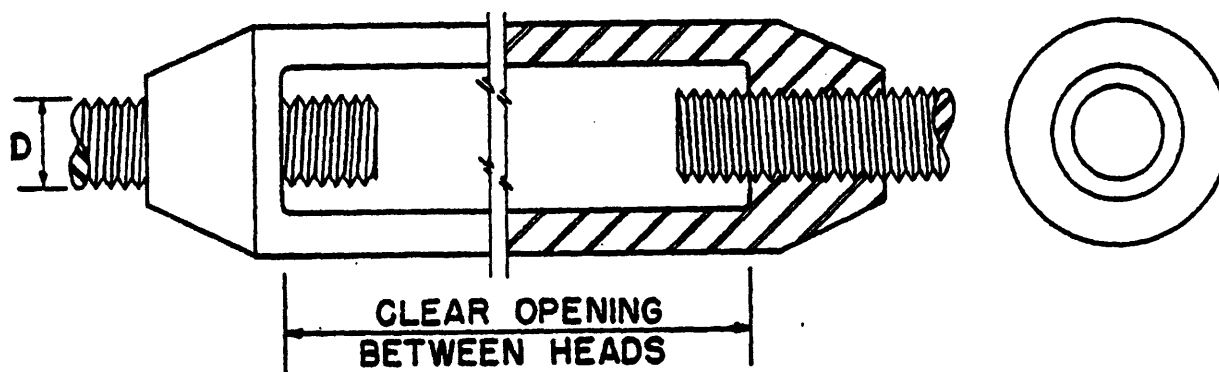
Type I, form 1, open turnbuckle body, forged.
